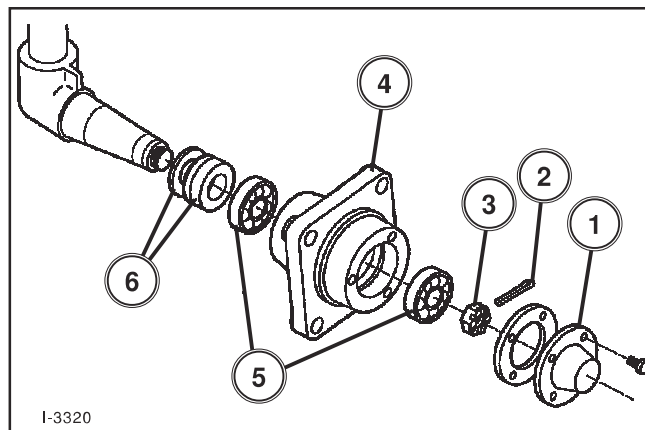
To check grease or adjust front wheel bearings, proceed as follows:
